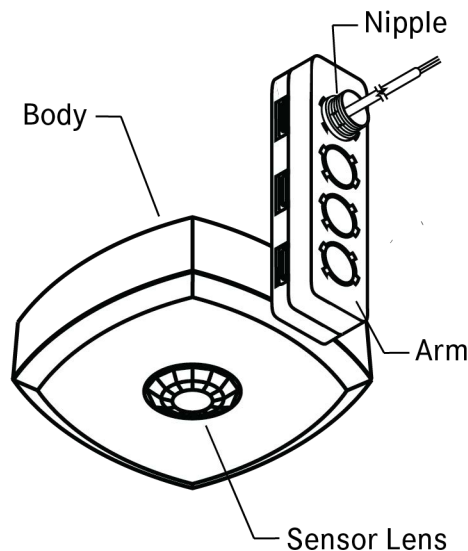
PSC-BL-I-FM-110-xx Sensor Arm Mount Assembly
